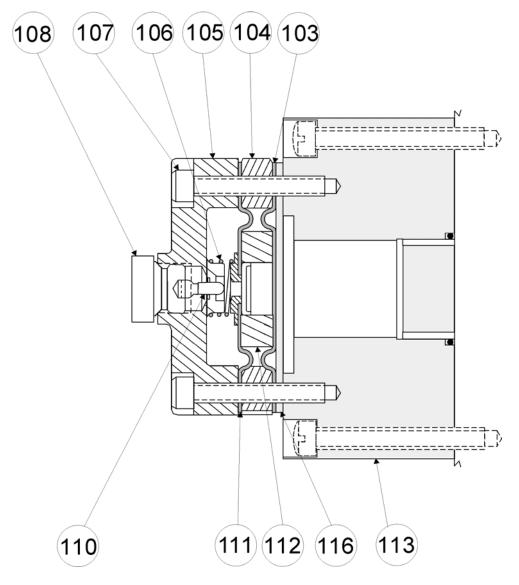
Remote Set Regulator Assembly Basic Parts
